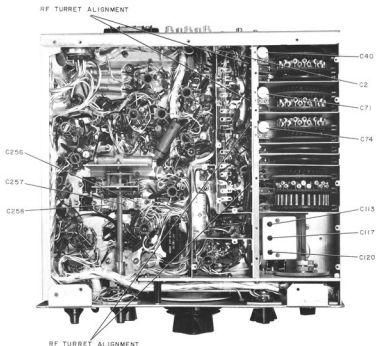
Bottom Chassis, Alignment and Adjustment Locations
